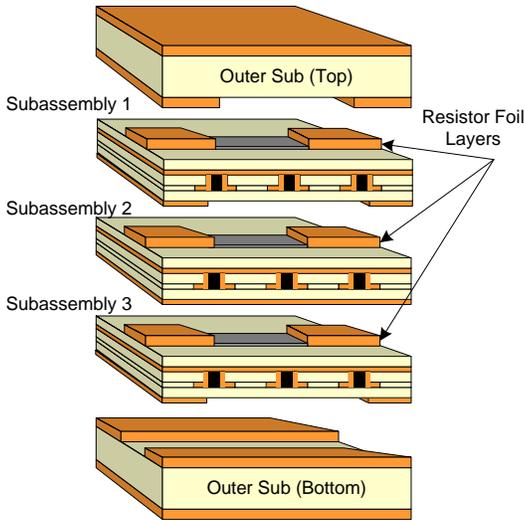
Stack up of multilayer PCB with subassemblies and multiple embedded resistor layers
